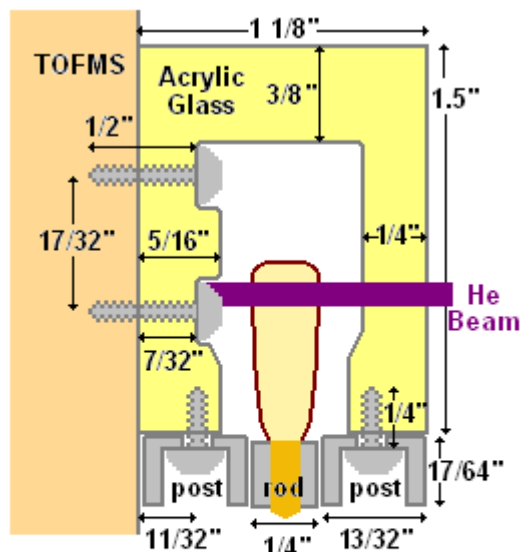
Cross section of an alignment device made from 0.64 cm-thick acrylic glass, 1.3-cm-diameter Al rod, and 6-32 machine screws.
